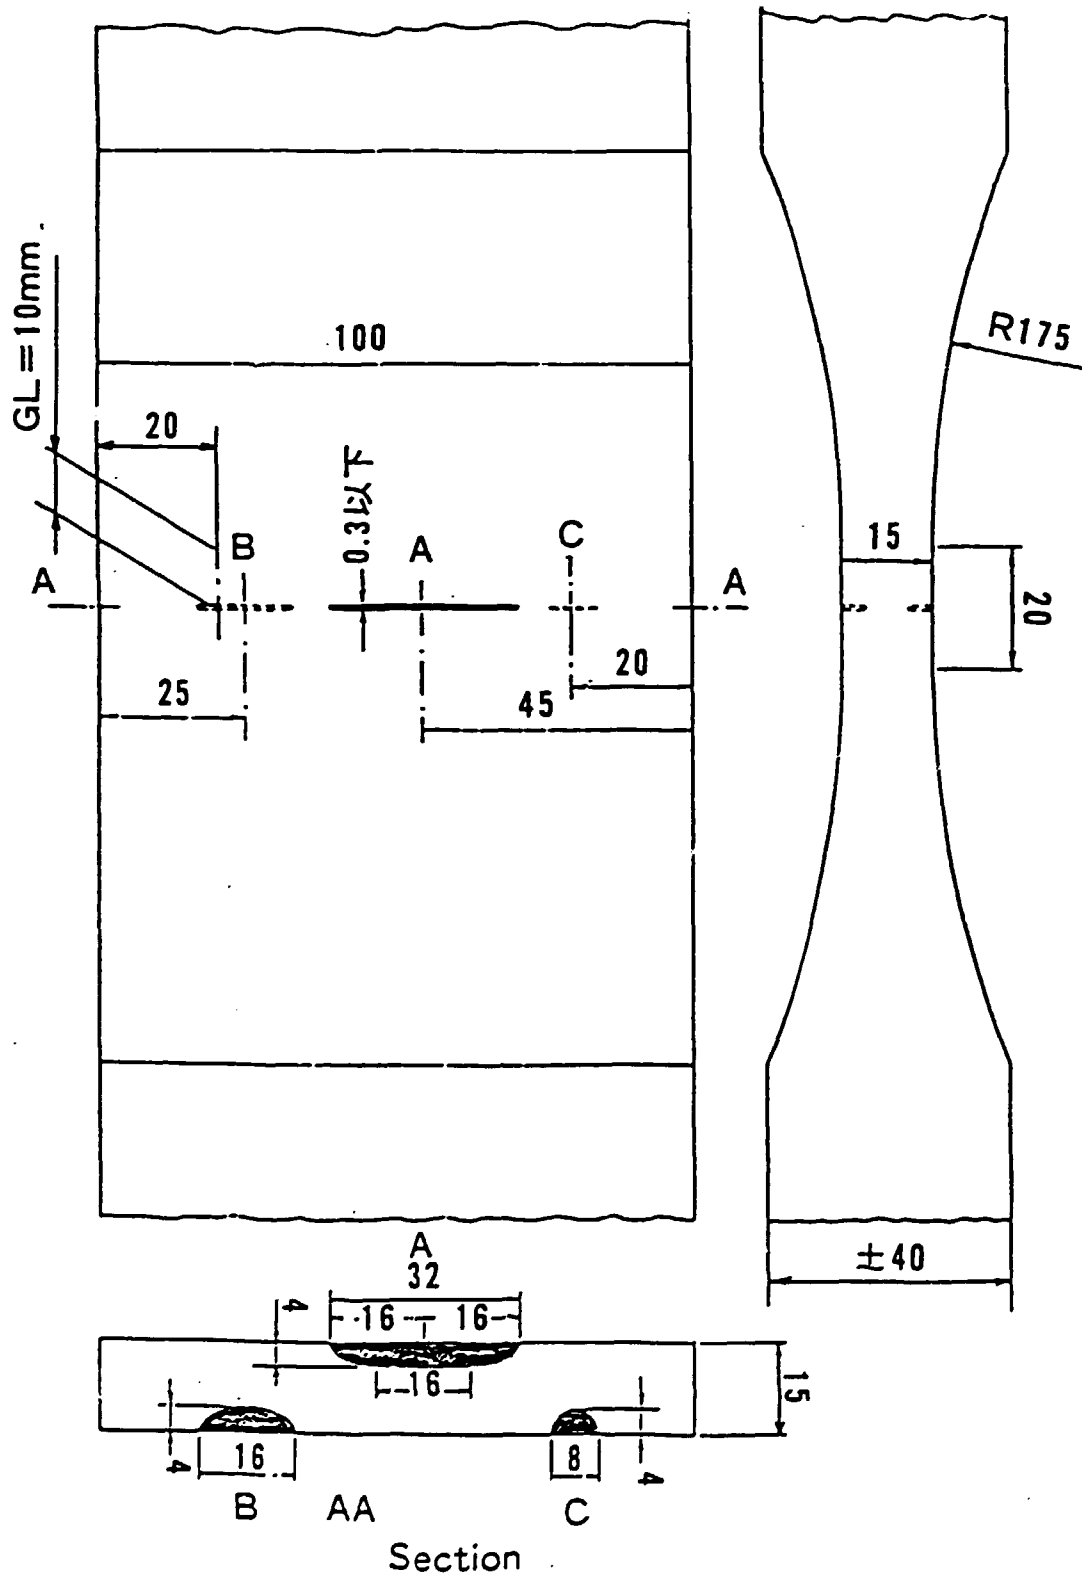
Surface crack growth test specimen (unit: 1 mm).
